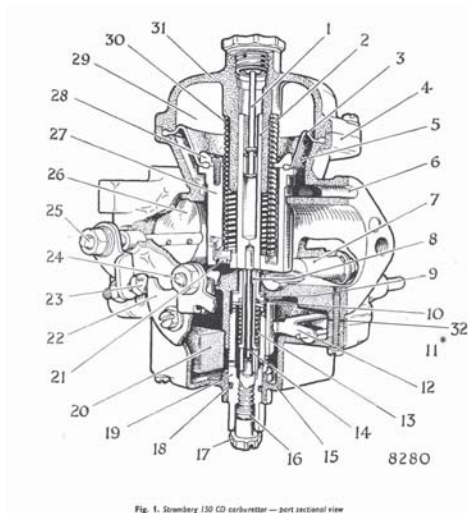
Stromberg 130 CD carburettor — port sectional view
